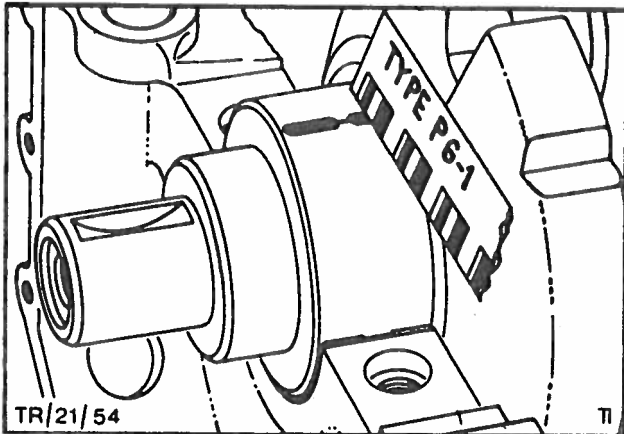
Checking the main bearing clearance with the use of 'Plastigauge'
